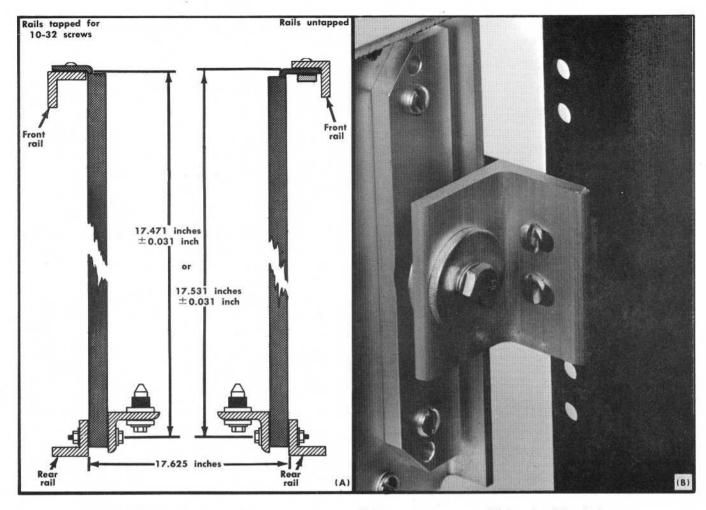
Supporting the rear of the stationary sections: (A) Dimensions necessary; (B) Completed installation.
